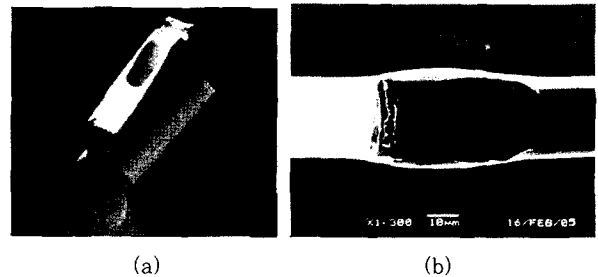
Wedge bonding tool (wedge,(a))¹⁴⁾ and joints of bonding(b)²⁾
